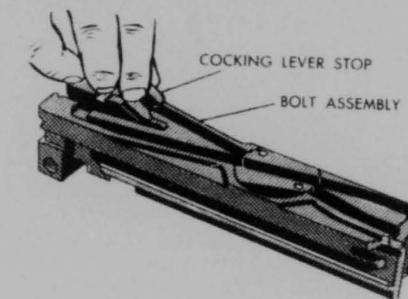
Inserting Cocking Lever Stop Into Bolt.
